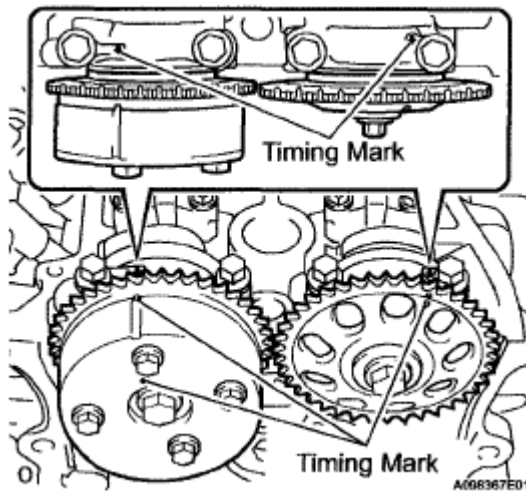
Identifying Timing Marks Of Camshaft Timing Gear
